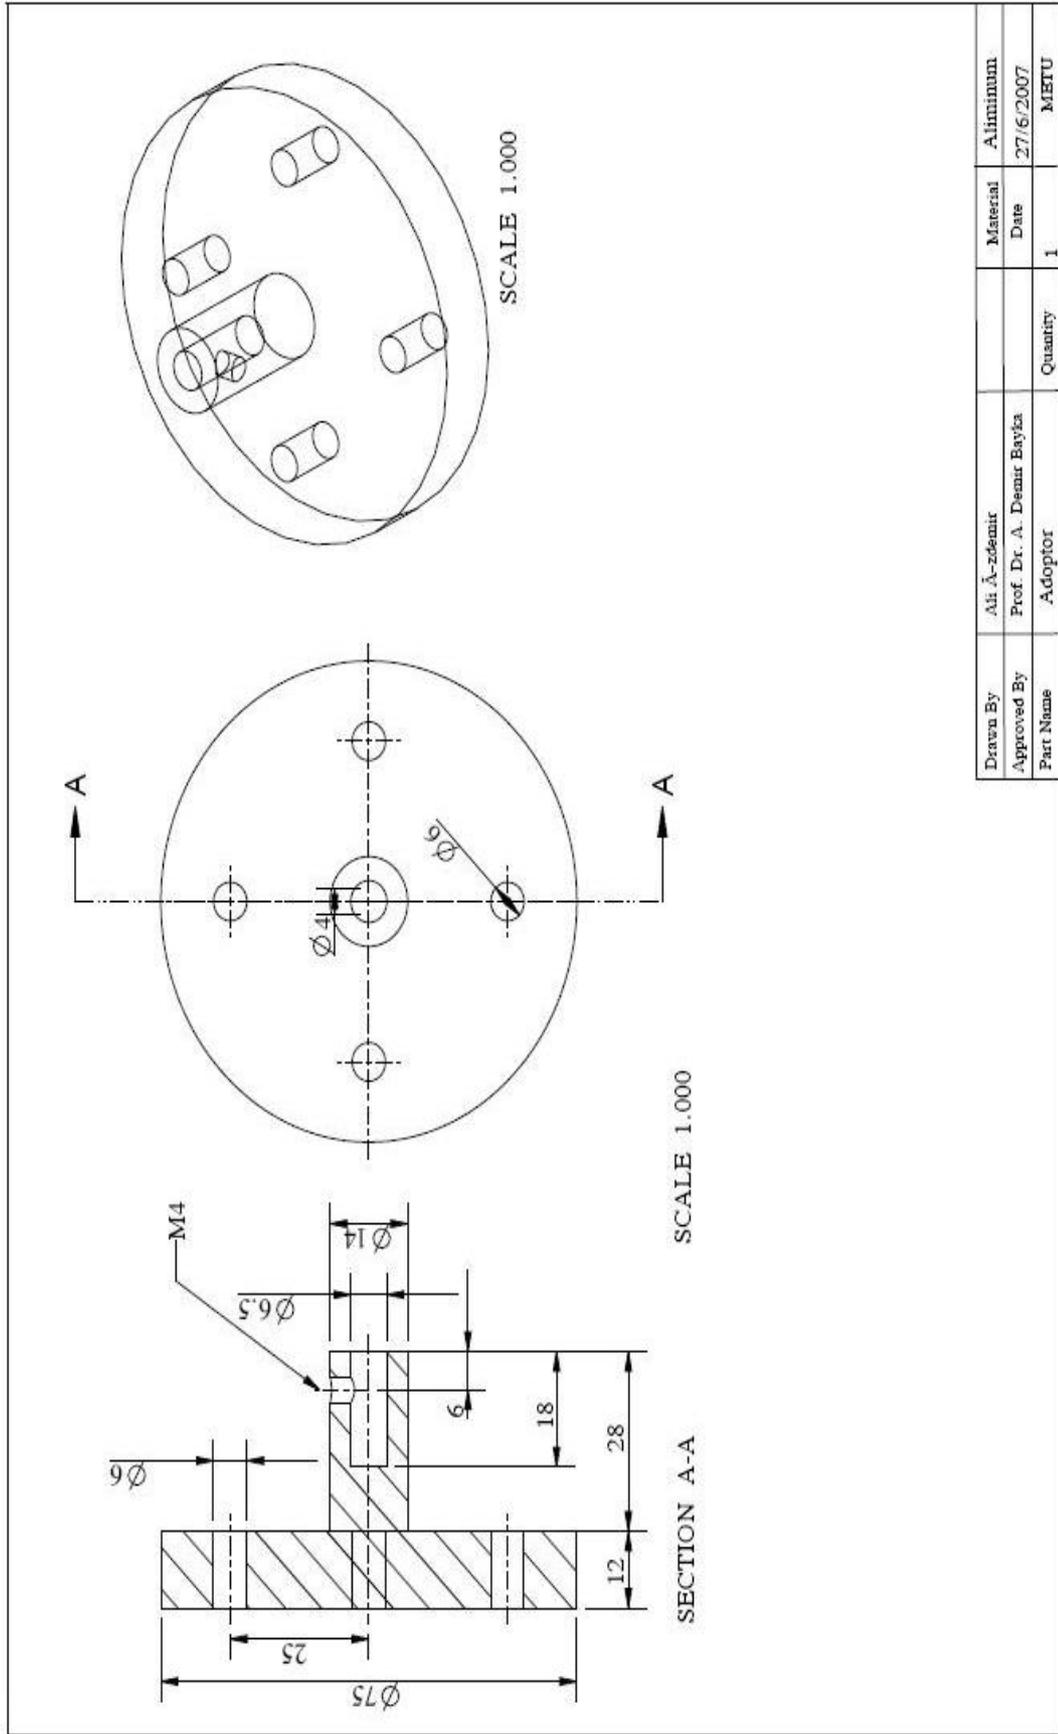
Technical Drawing of Flange of Loading Mechanism
